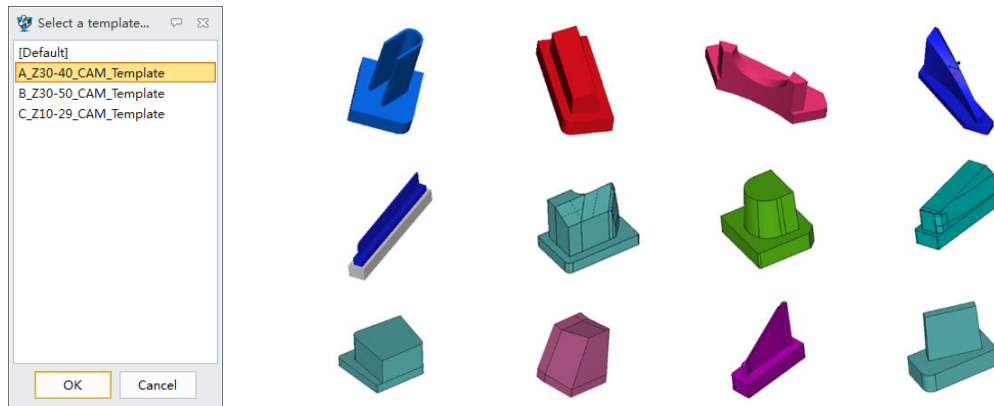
Using Template Techniques to Machine Similar Electrodes with Only One-Click
